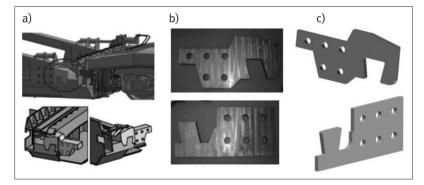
Views: a) side lock area between rotatable platform and over bogie part of the intermodal wagon, b) separated hook-shaped connector prepared to tests, c) 3D draw of dovetail joint
